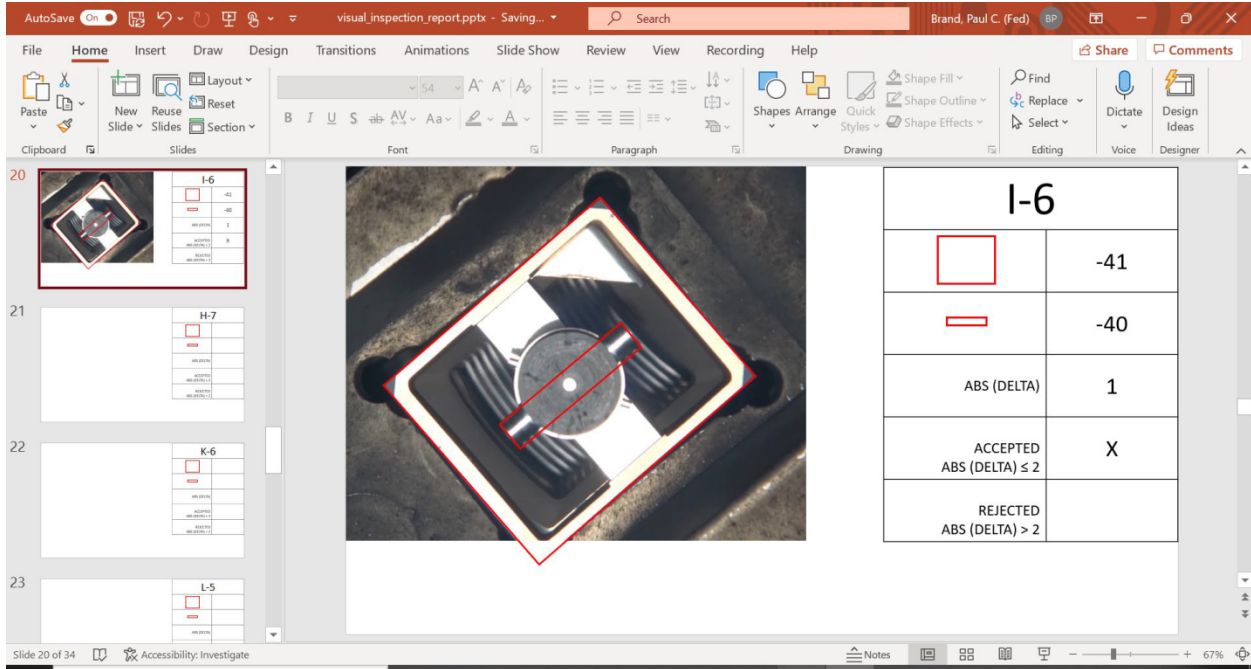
"Completed Sheet for Fuel Head Visual Inspection Analysis – Accepted,"
